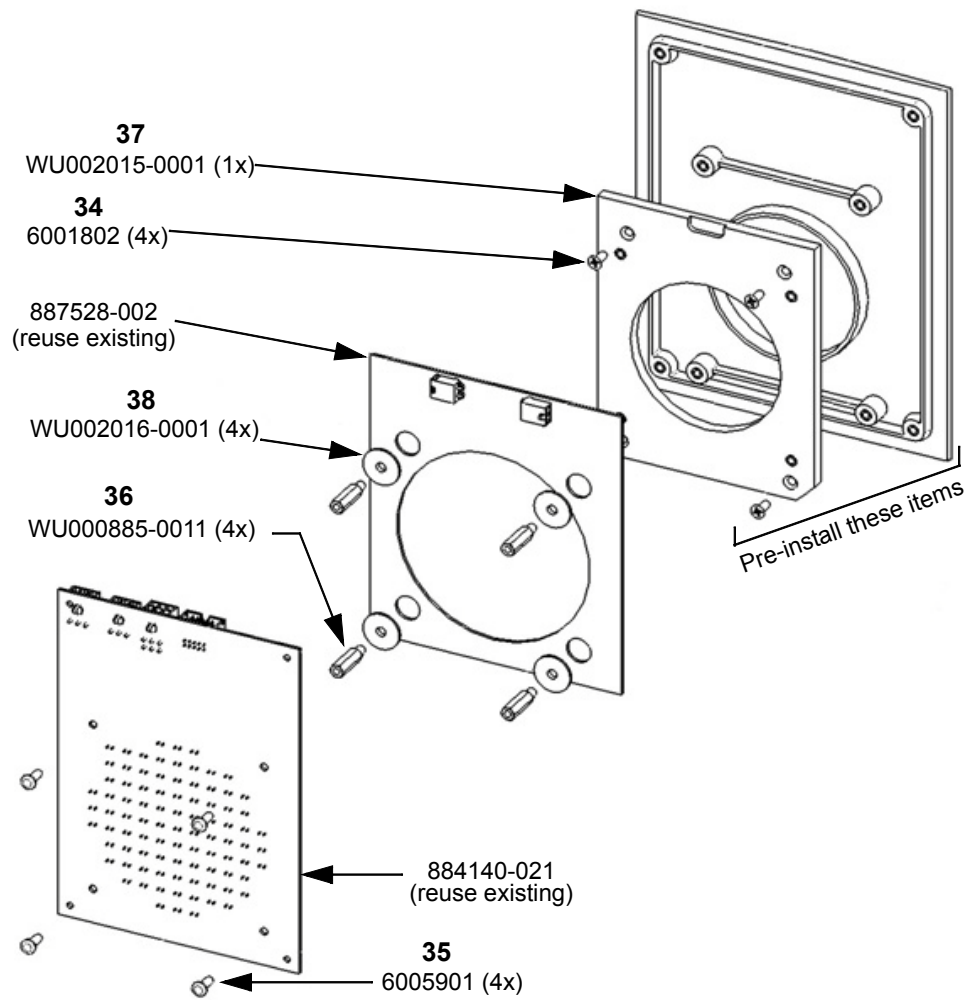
D - SCAN COMPONENTS AND ASSEMBLY (OPTION 1)
